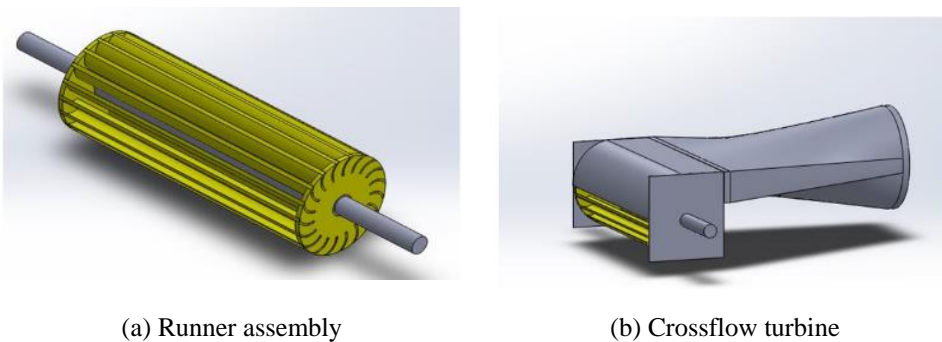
Crossflow turbine (a) runner assembly, (b) crossflow turbine assembly.
